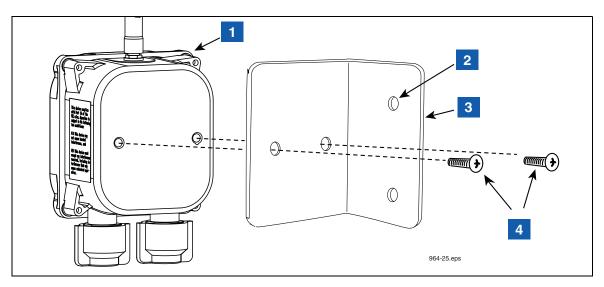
Attaching Mounting Bracket To Receiver Or Repeater
